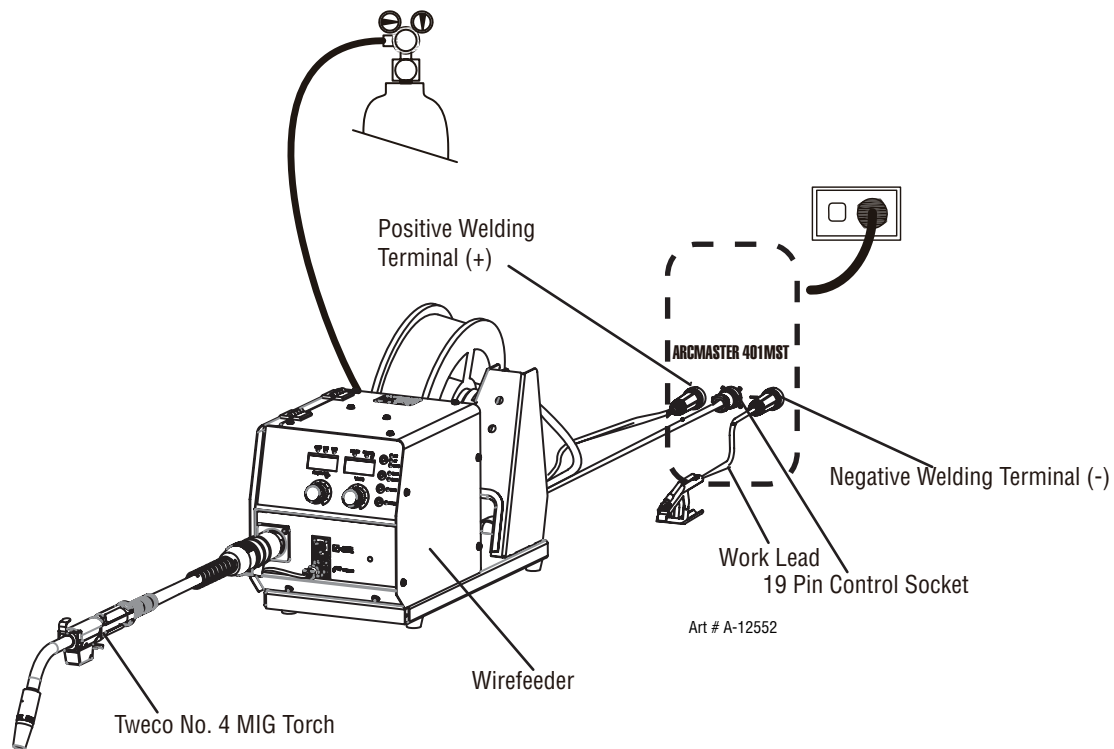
Setup for MIG (GMAW) Welding with Gas Shielded MIG Wire
